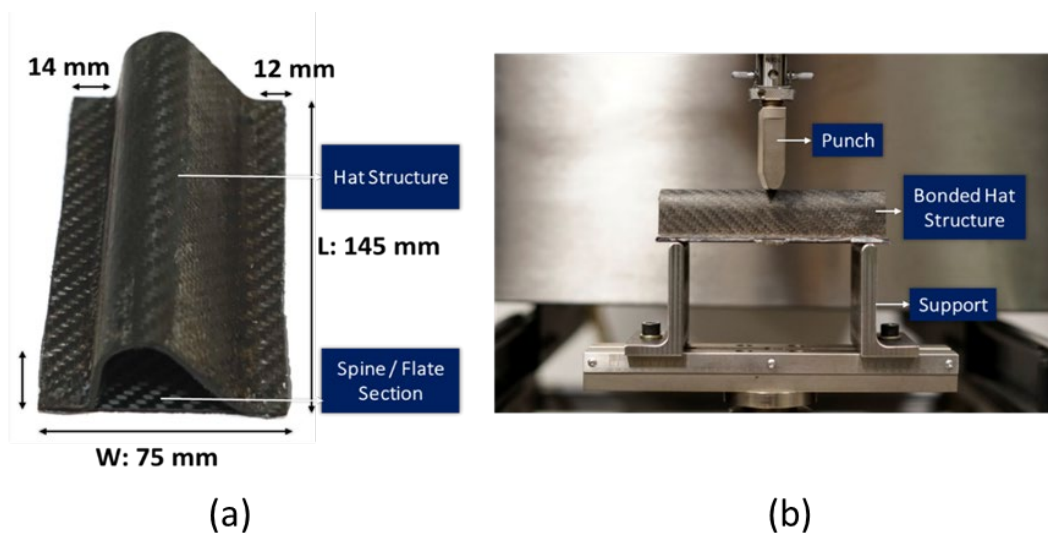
(a) Dimensions of bonded hat structure (b) Experimental setup for 3-point bend test showing the bonded hat structure, supports and punch.
